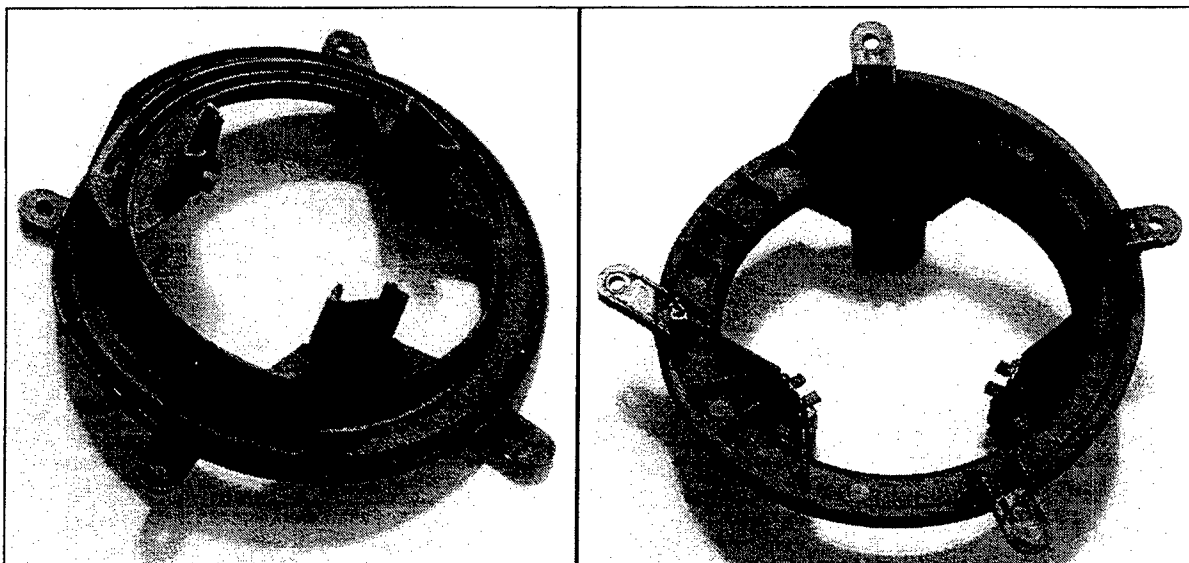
Top and bottom view of a motor holder, PA66/35%GF, dia 230mm
